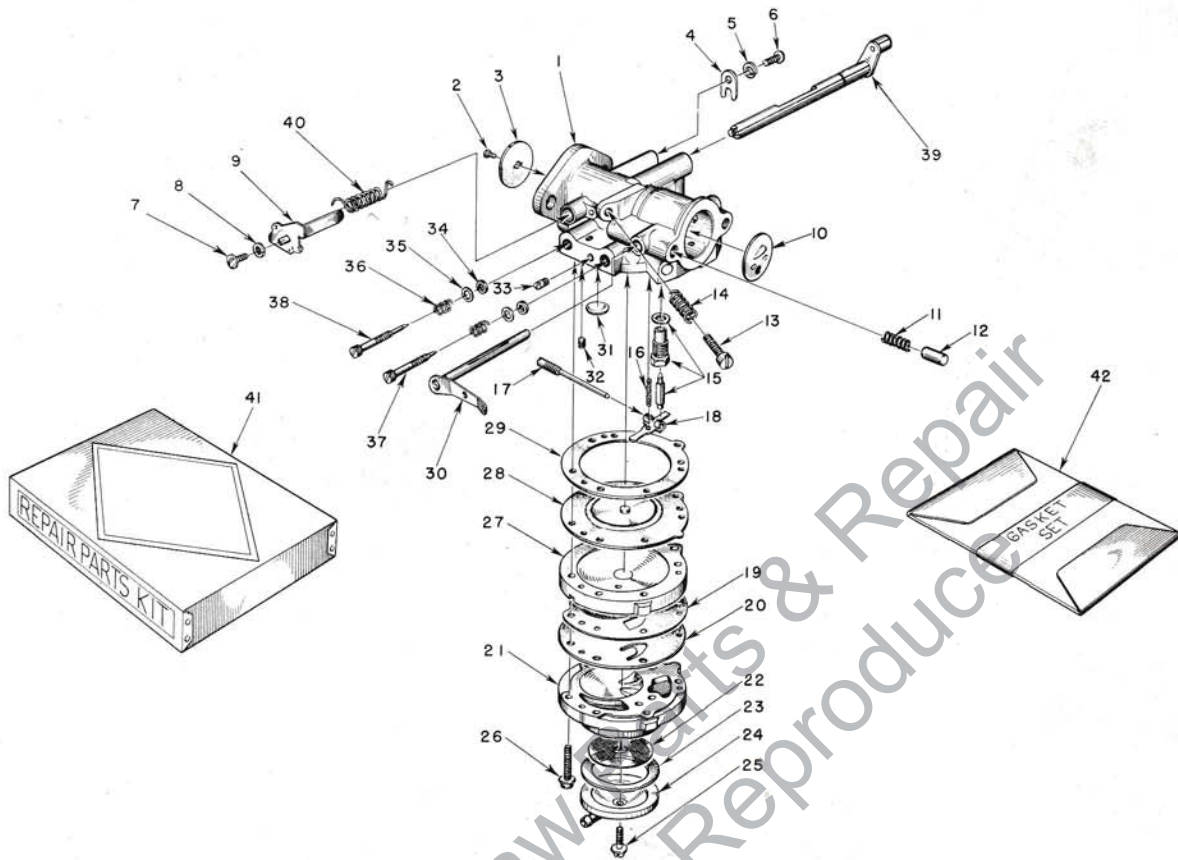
TILLOTSON HL-46B CARBURETOR PARTS
